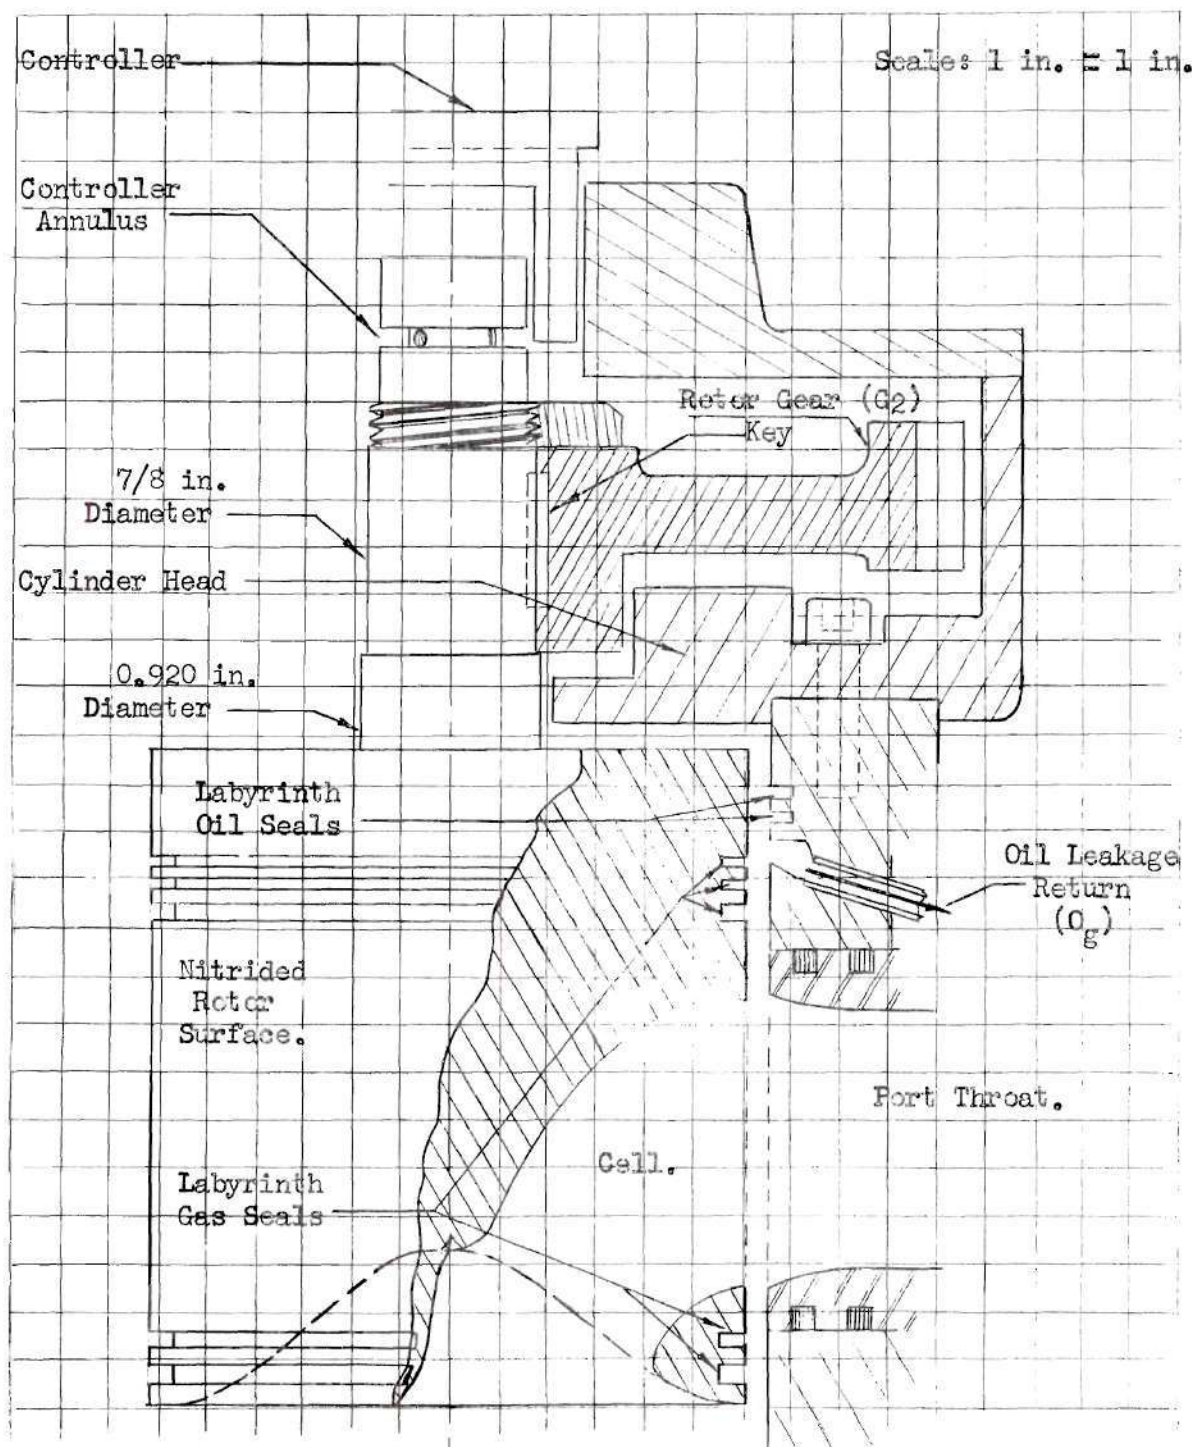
Detail View of Rotor, Upper Cylinder, Cylinder Head
